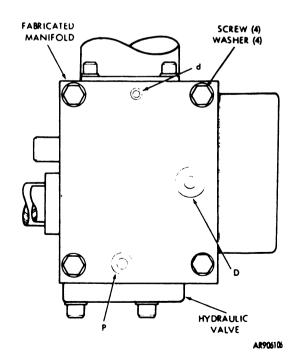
Gunner's hydraulic control valve with test manifold installed (1 of 2).
